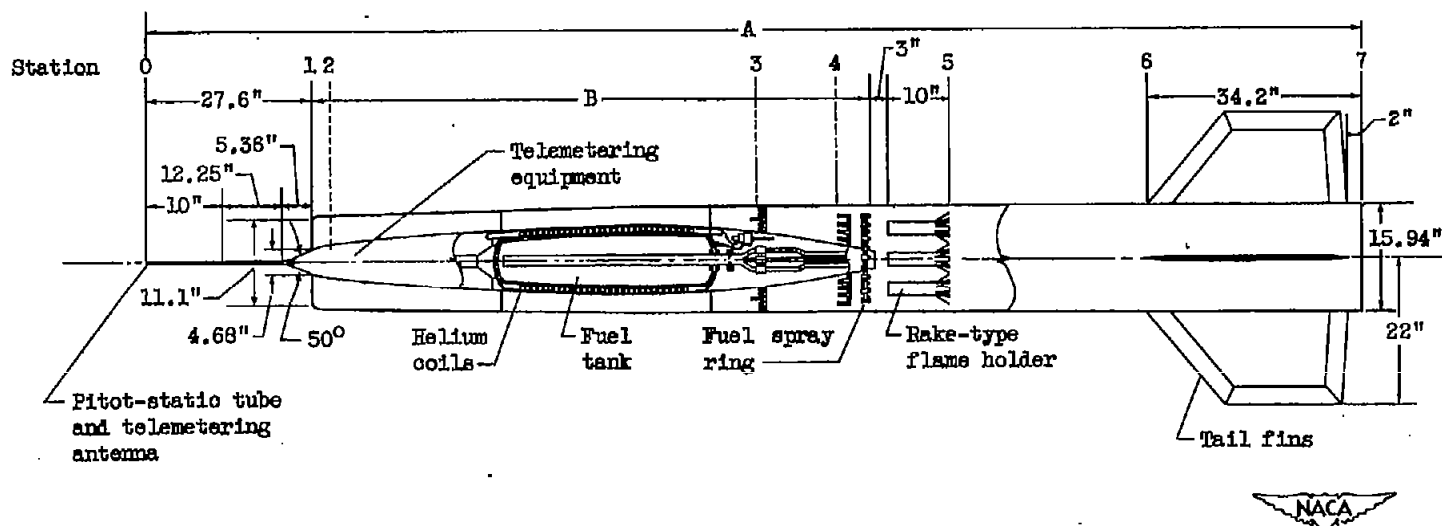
Schematic cross-sectional diagram of supersonic 16-inch-diameter ram-jet unit; dimensions given for units D-1, D-2, D-3, and D-4.
